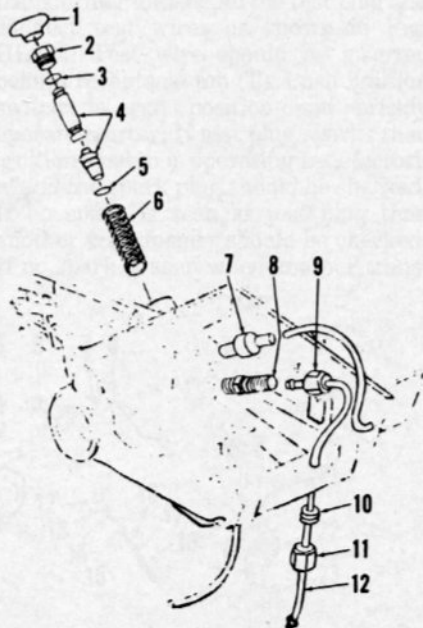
Exploded view of manual oil pump. End of oil line (12) is connected to fitting (24—Fig. HL276). Oil line (12) must be disconnected from fitting and pulled into air box for removal.
